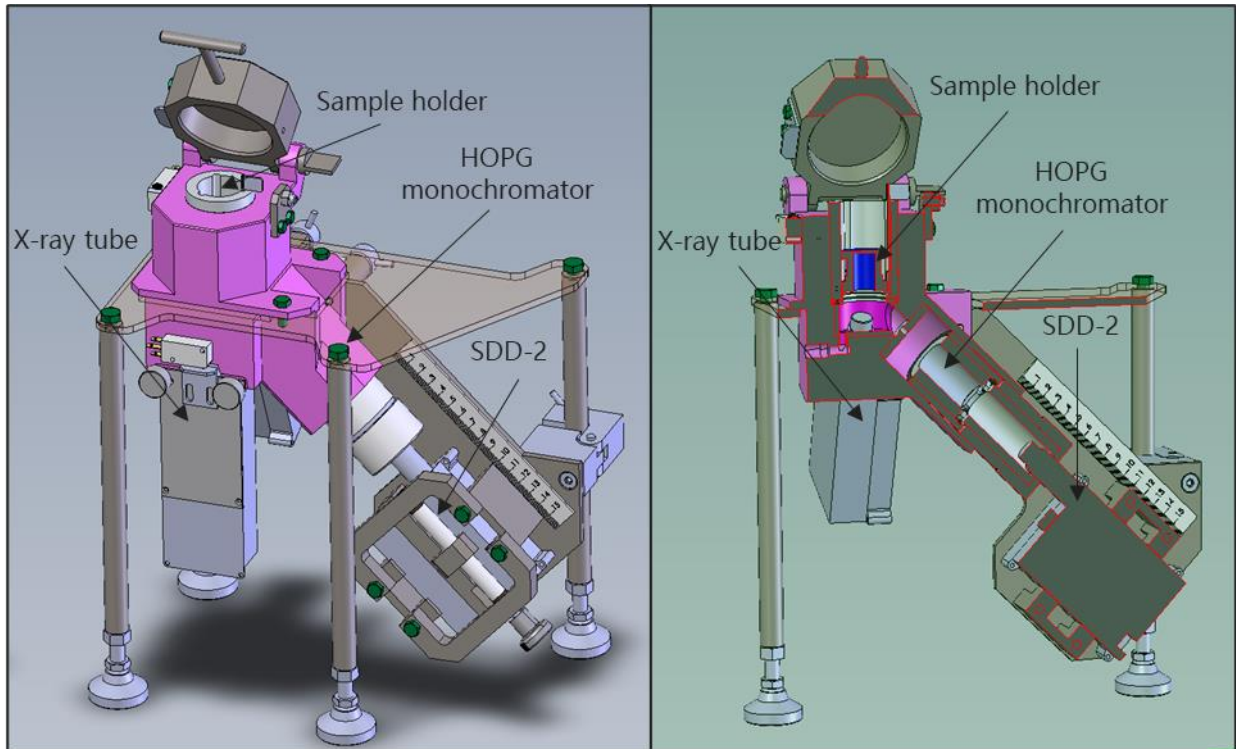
Drawing of the second detection channel equipped with the HOPG monochromator in side view (right panel) and cutaway view (left panel).
